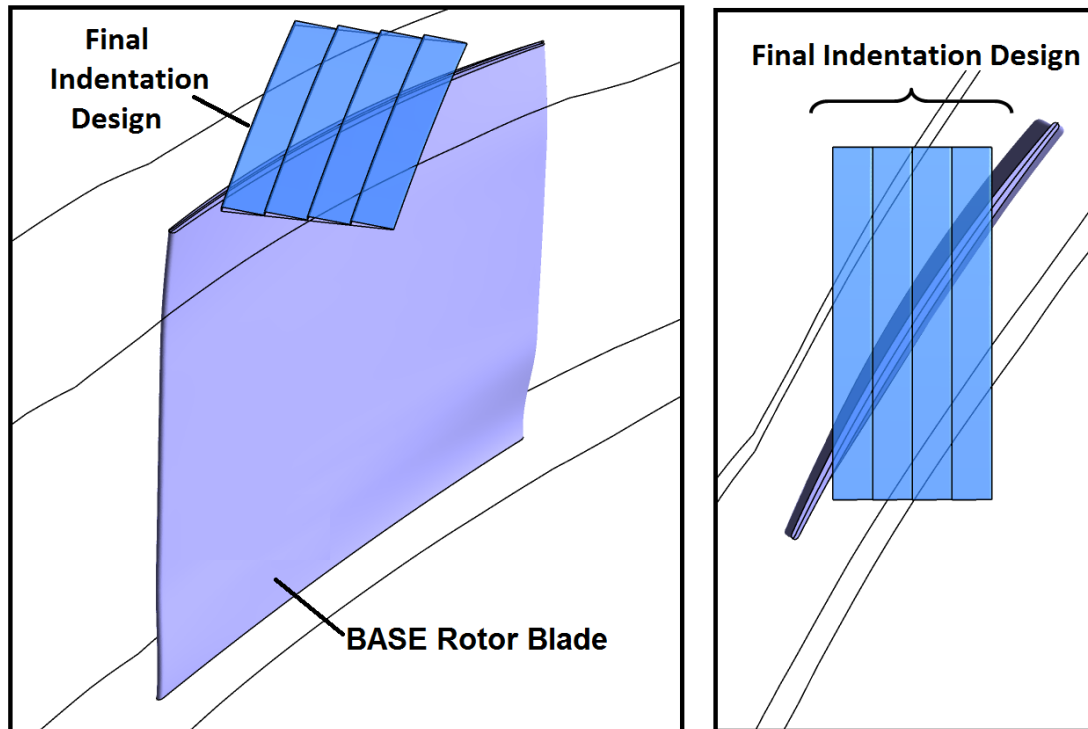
Placement of the final casing indentation on the BASE rotor passage
